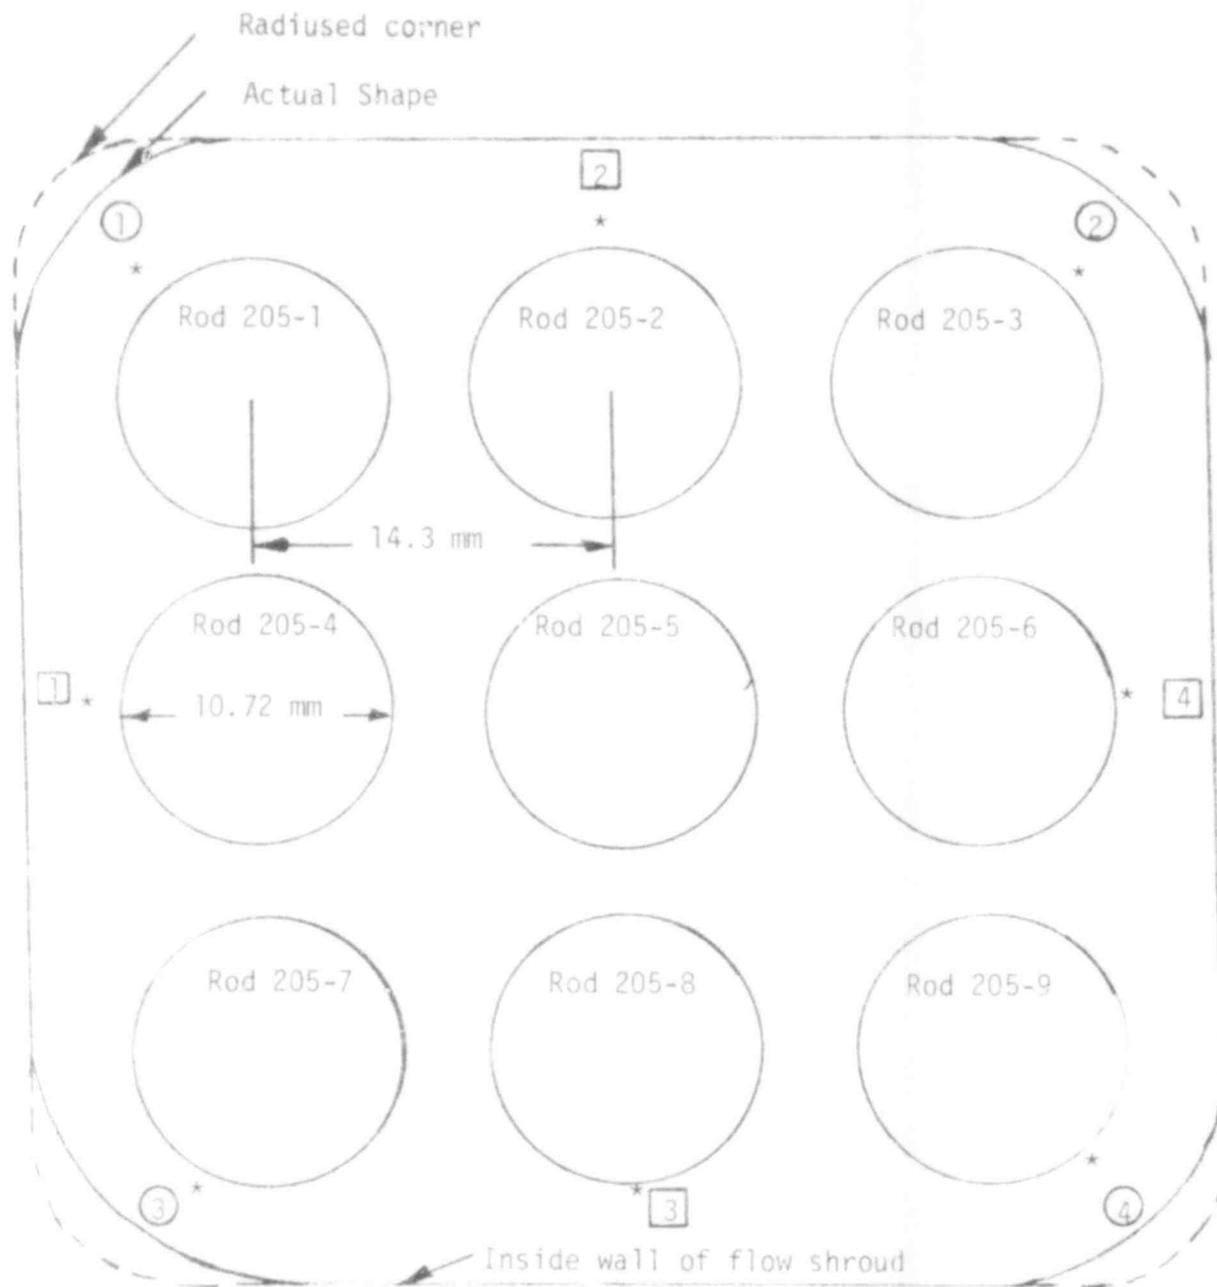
Test PCM-5 assembly showing fuel rod diameters, lattice spacing and shape of flow shroud.
